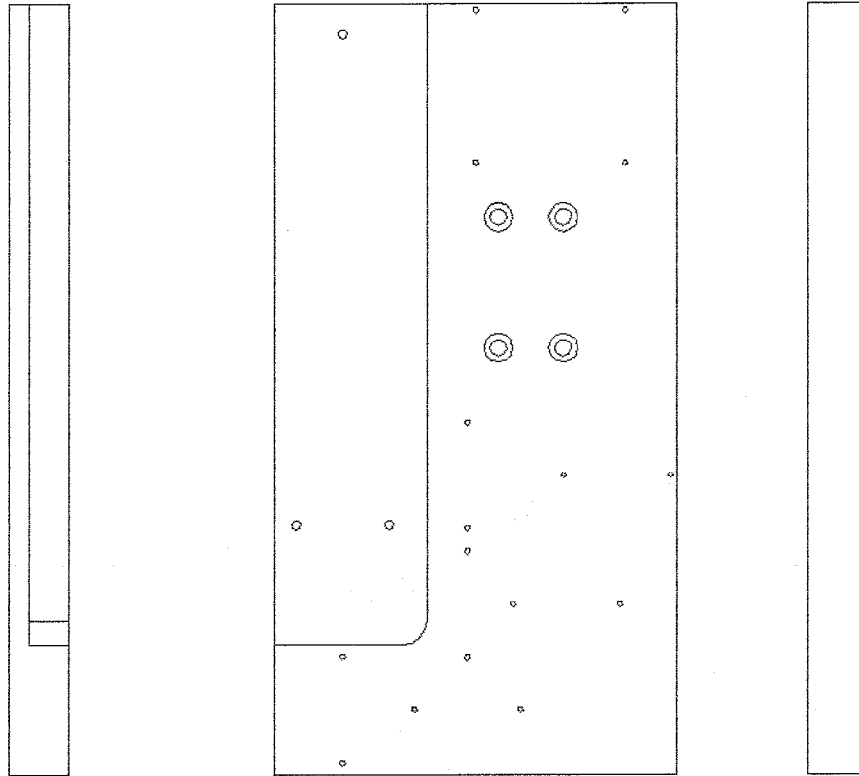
Aluminum mounting block for optical components axis 1 & 2 and laser head
